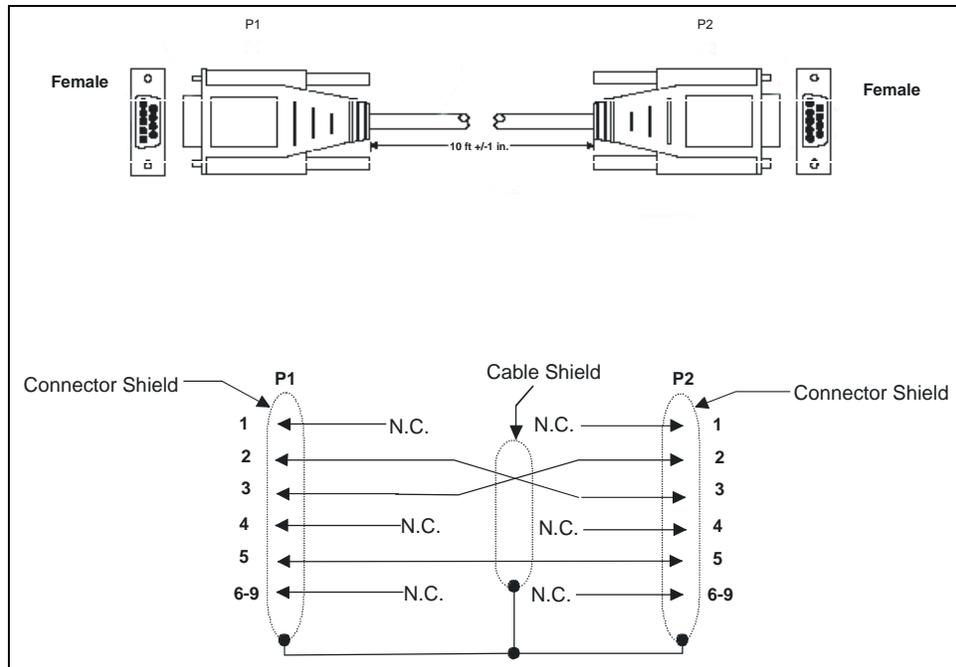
Serial Port to Serial Port Cable (P/N 0012-00-1275-01)
